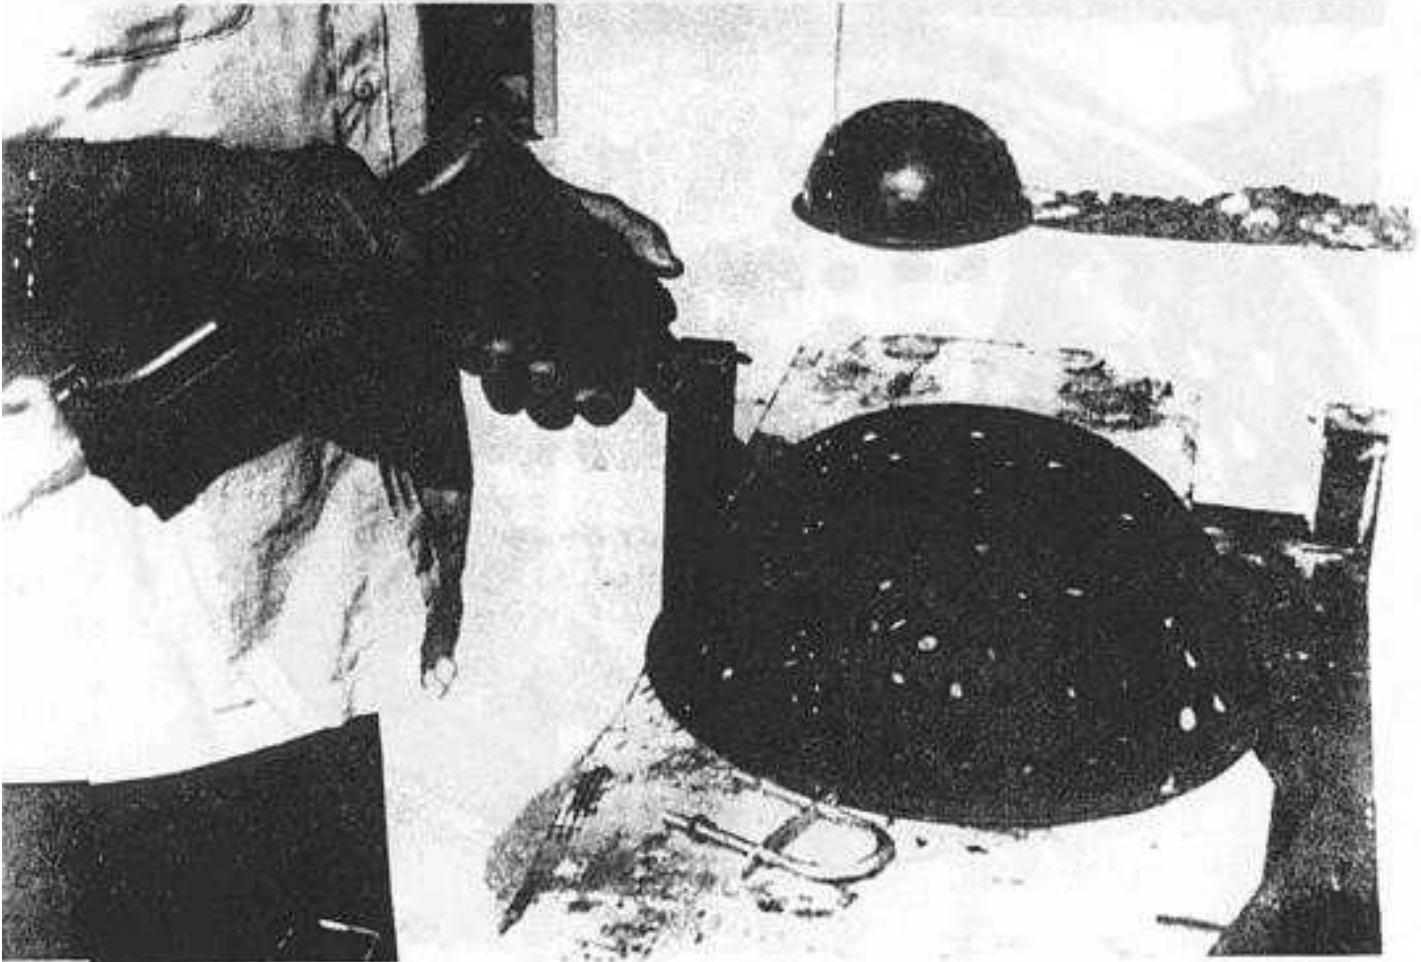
Drilling holes into the stainless steel mixing bowl to be used for the grate. Note the U-bolt in the foreground.
